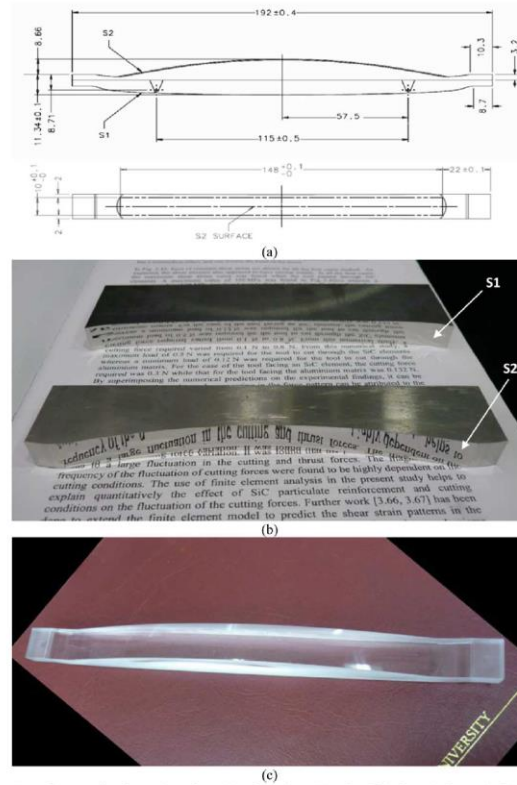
Freeform application: F-theta lens. (a) F-theta lens CAD Specifications (unit: mm). (b) F-theta mould insert. (c) F-theta mould injection product.
